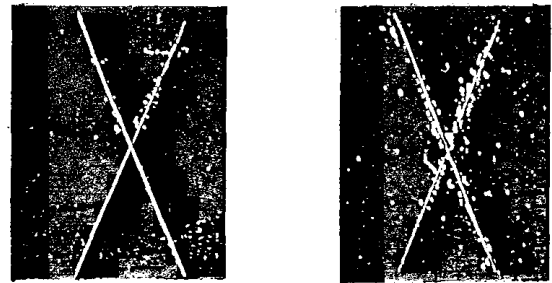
Photographs of corrosion of magnesium die-casting surface treated with chemical conversion treatment for aluminum (Salt dip test condition; temperature: 30°C, concentration: 3W/V %.)
